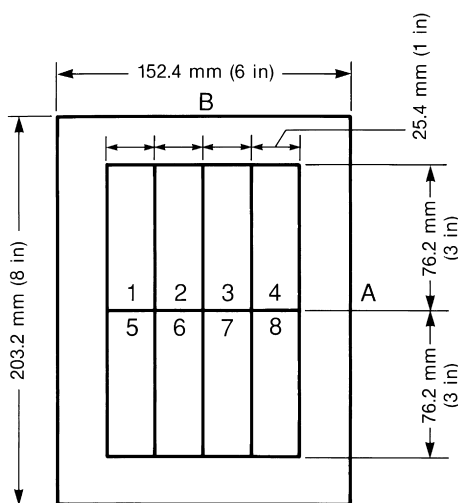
Layout showing the locations of eight numbered specimens cut from 152×203 -mm injection-molded plaques.
